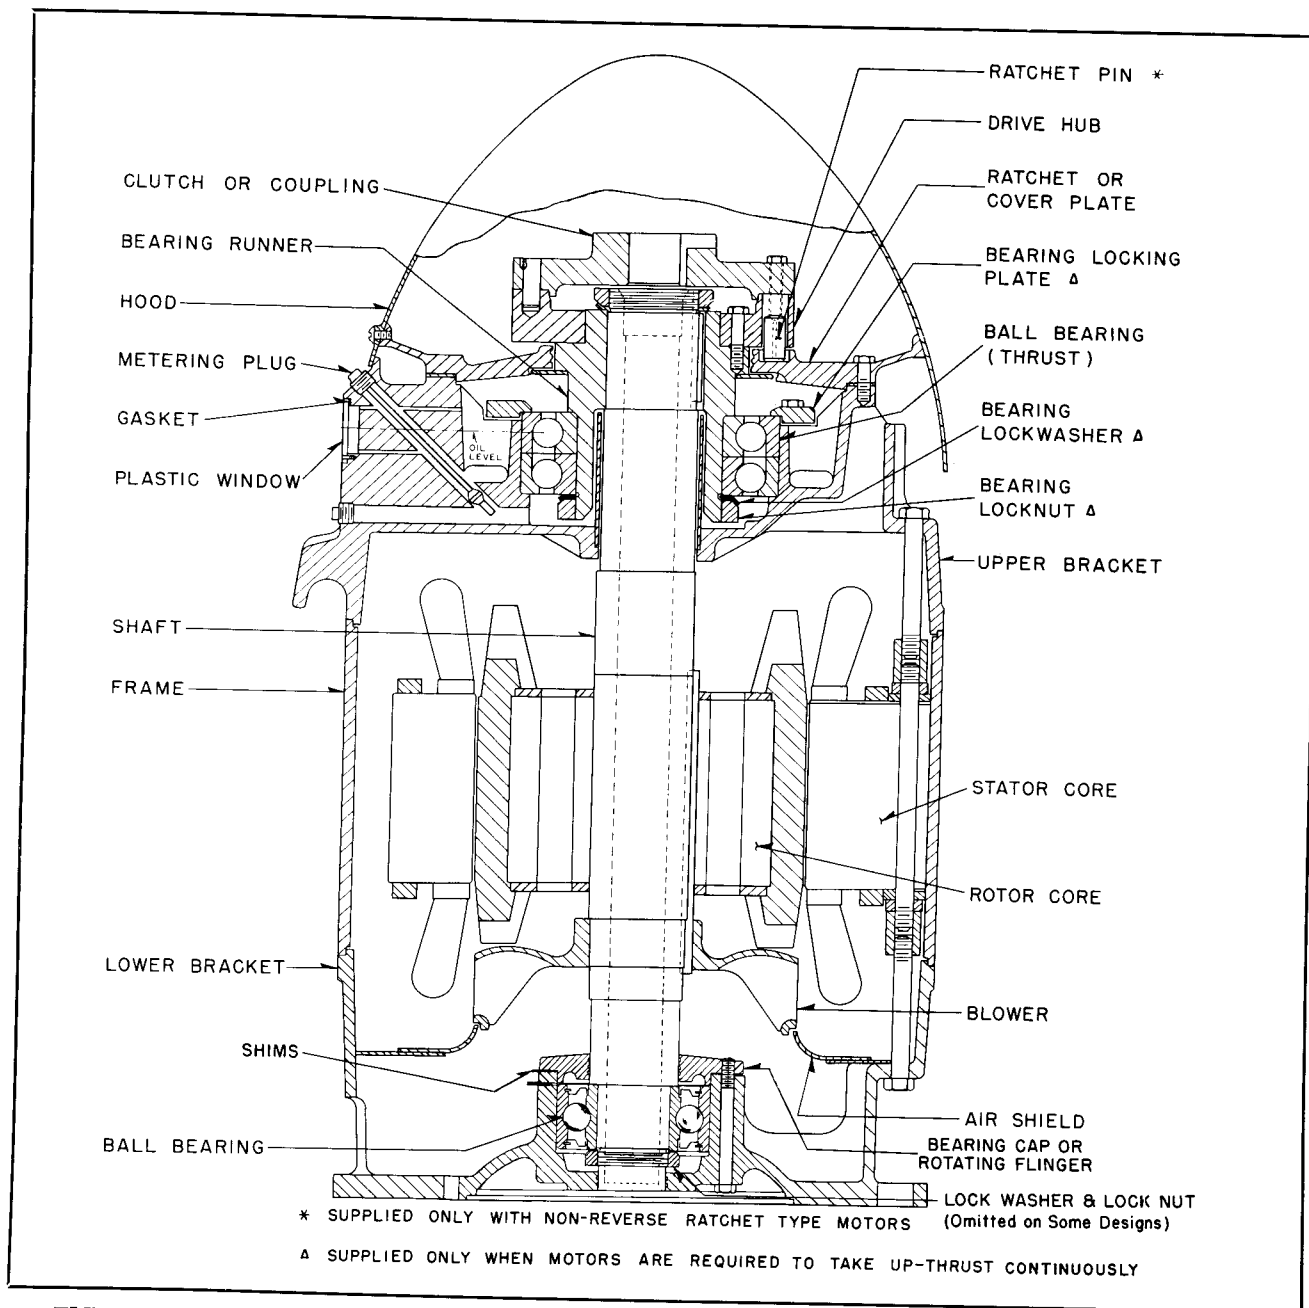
Hollow Shaft High Thrust. (Solid Shaft Motors Use Same Construction Except Coupling Omitted).
